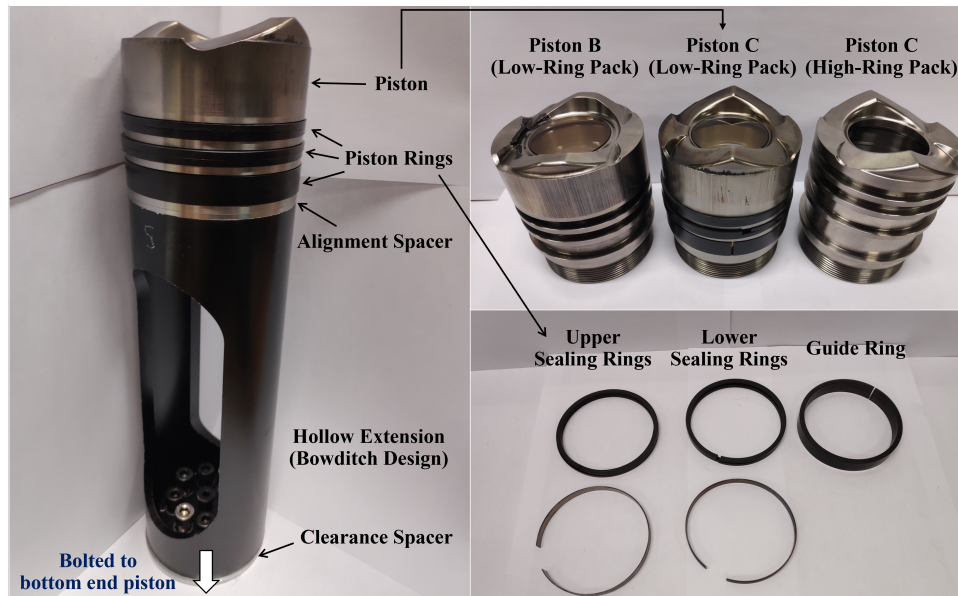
Optically accessible engine piston assembly. Left: Bowditch design with hollow extension rod and low-ring pack piston C; Top-Right: pistons with shaped crown; Bottom-Right: piston rings.
